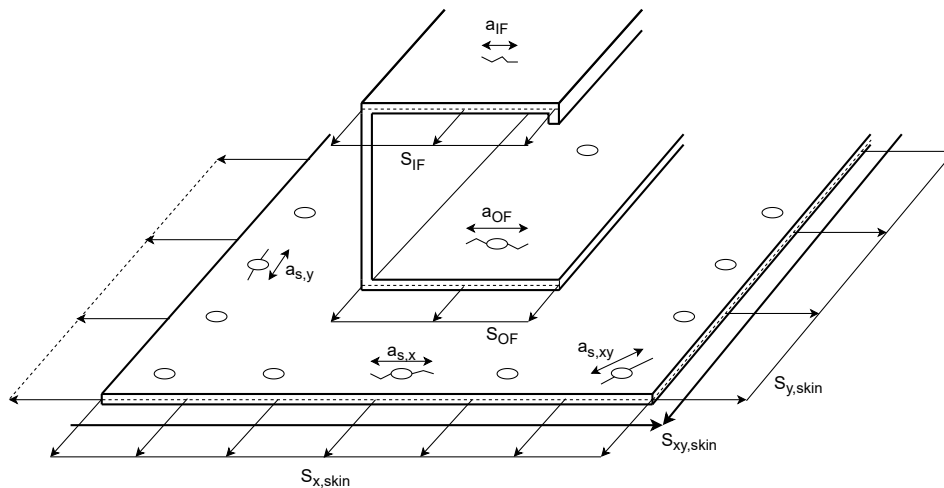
The evaluated crack cases in the skin due to axial and shear stresses, the frame outer flange (OF) and the frame inner flange (IF).
